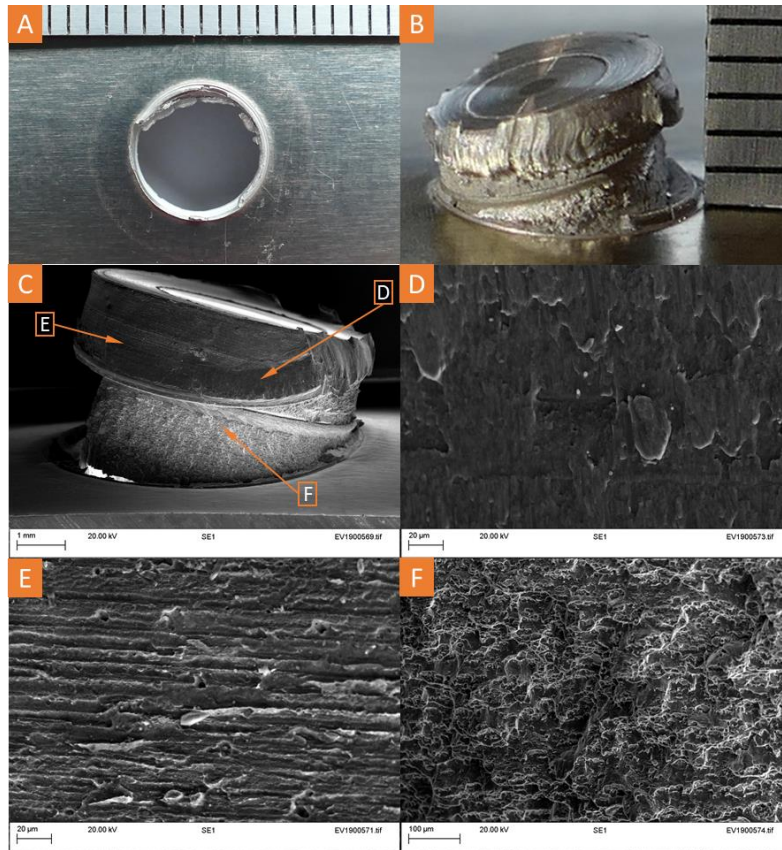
Fracture surfaces of a plug pull out top sheet failure mode of RFSSW AA2024-T3 condition W1 (RS = 1000 rev/min; PD = 2.0 mm):
